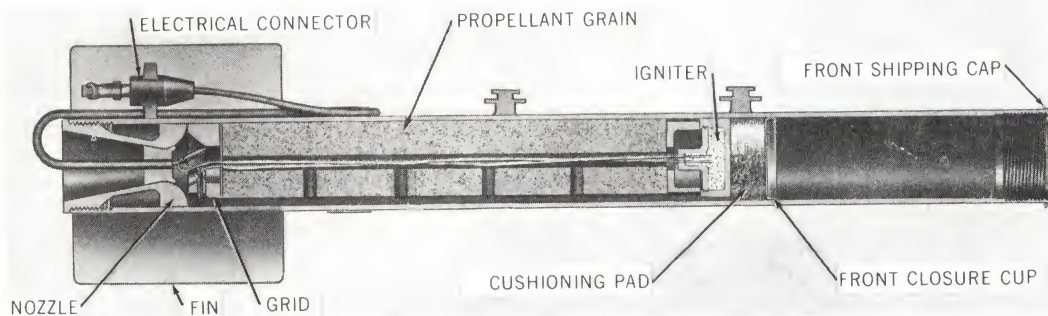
2.25-Inch Rocket Motor Mk 15 Mod 2, Cross Section.
